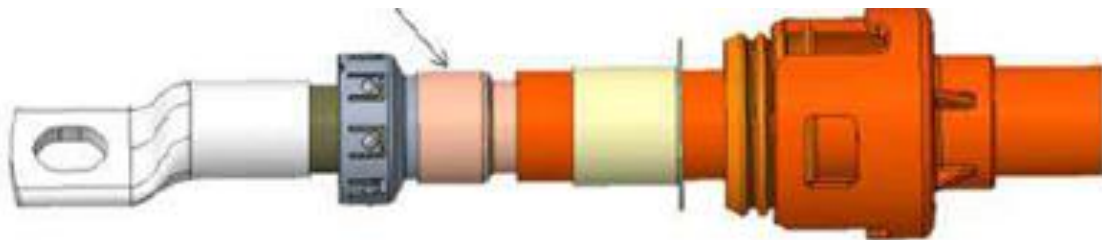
Preview of the cable before the ferrule assembly process – IPT HD connector – 50mm², 70mm², 95mm²
